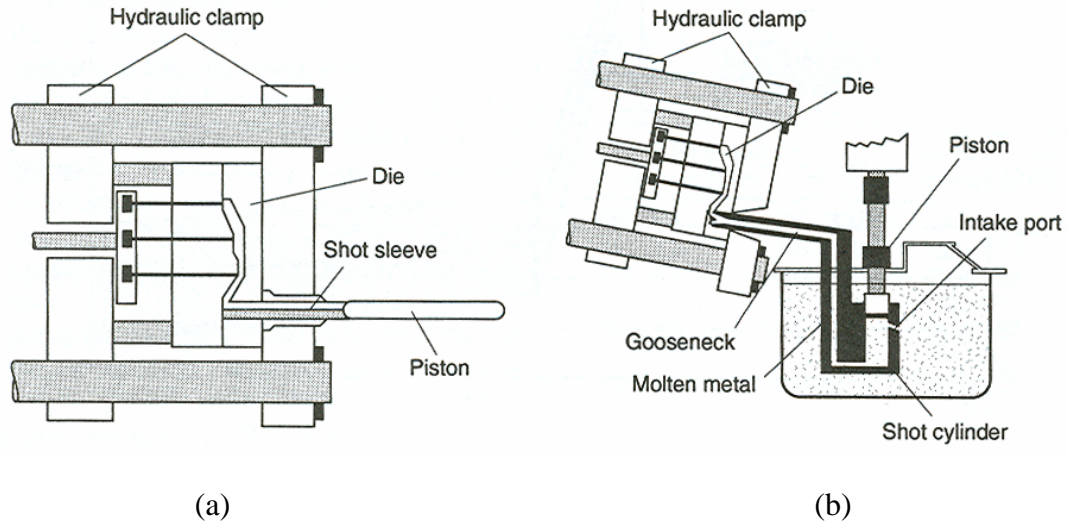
Machines for die-casting magnesium alloys. (a) Cold-chamber machine and (b) Hot-chamber machine [3].
